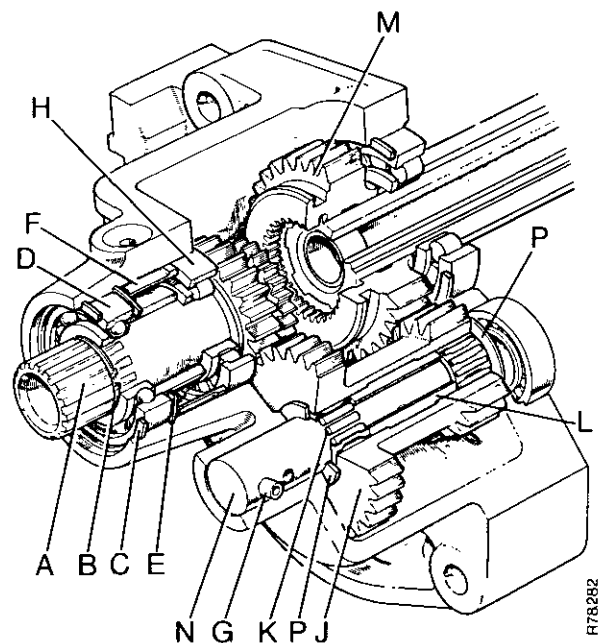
SLOW/NORMAL GEAR ASSEMBLY
